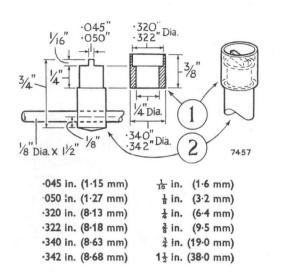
Main jet key for Solex B30 PIHT-2 carburettor
